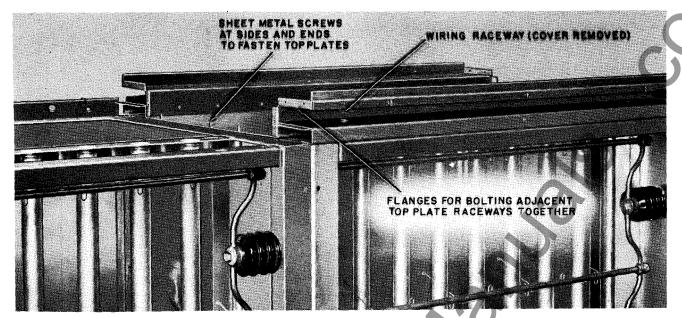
Assembly of Top Plates (Shows Only One Top Plate in Place)
